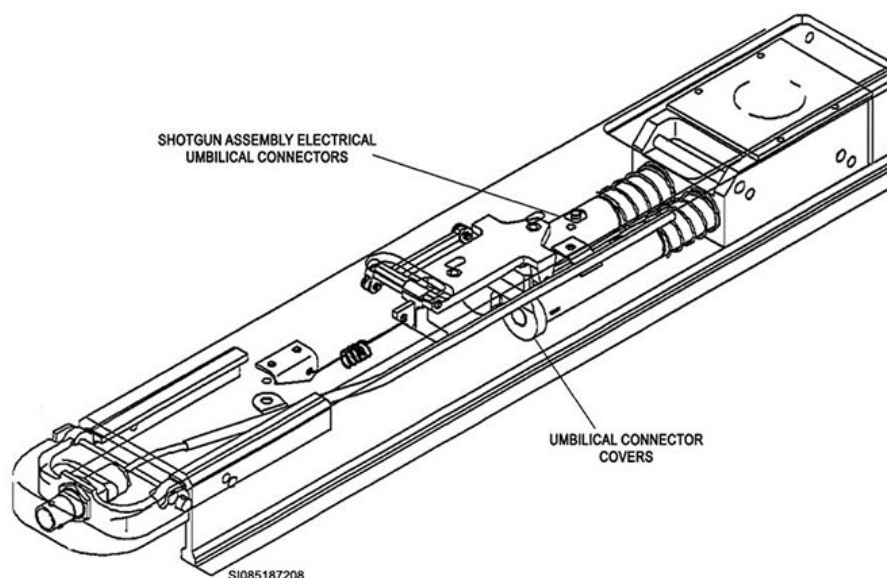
Modified M299 missile launcher shotgun assembly.
